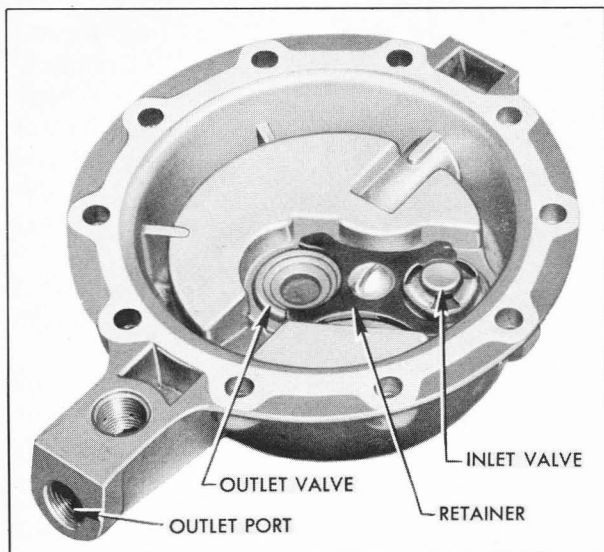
Valves and Retainer Installed in Fuel Cover
